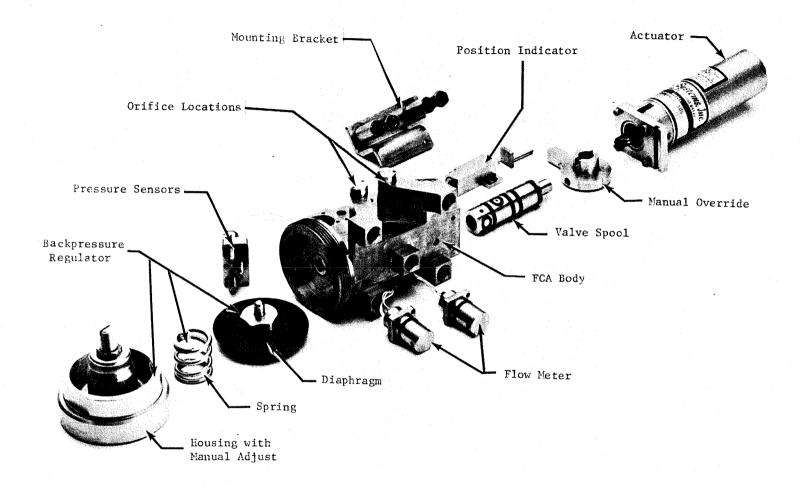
FLUIDS CONTROL ASSEMBLY EXPLODED VIEW
